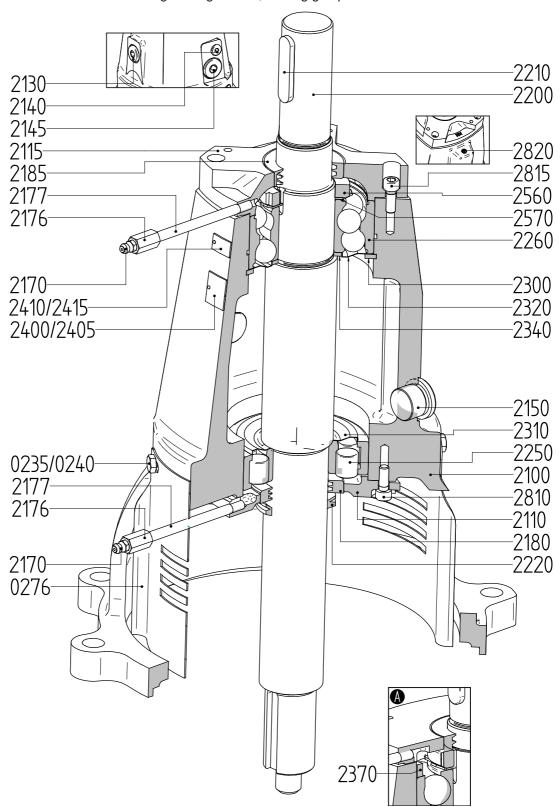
Sectional drawing bearing bracket, bearing group 1-2-3 (A = for bearing group 3).
